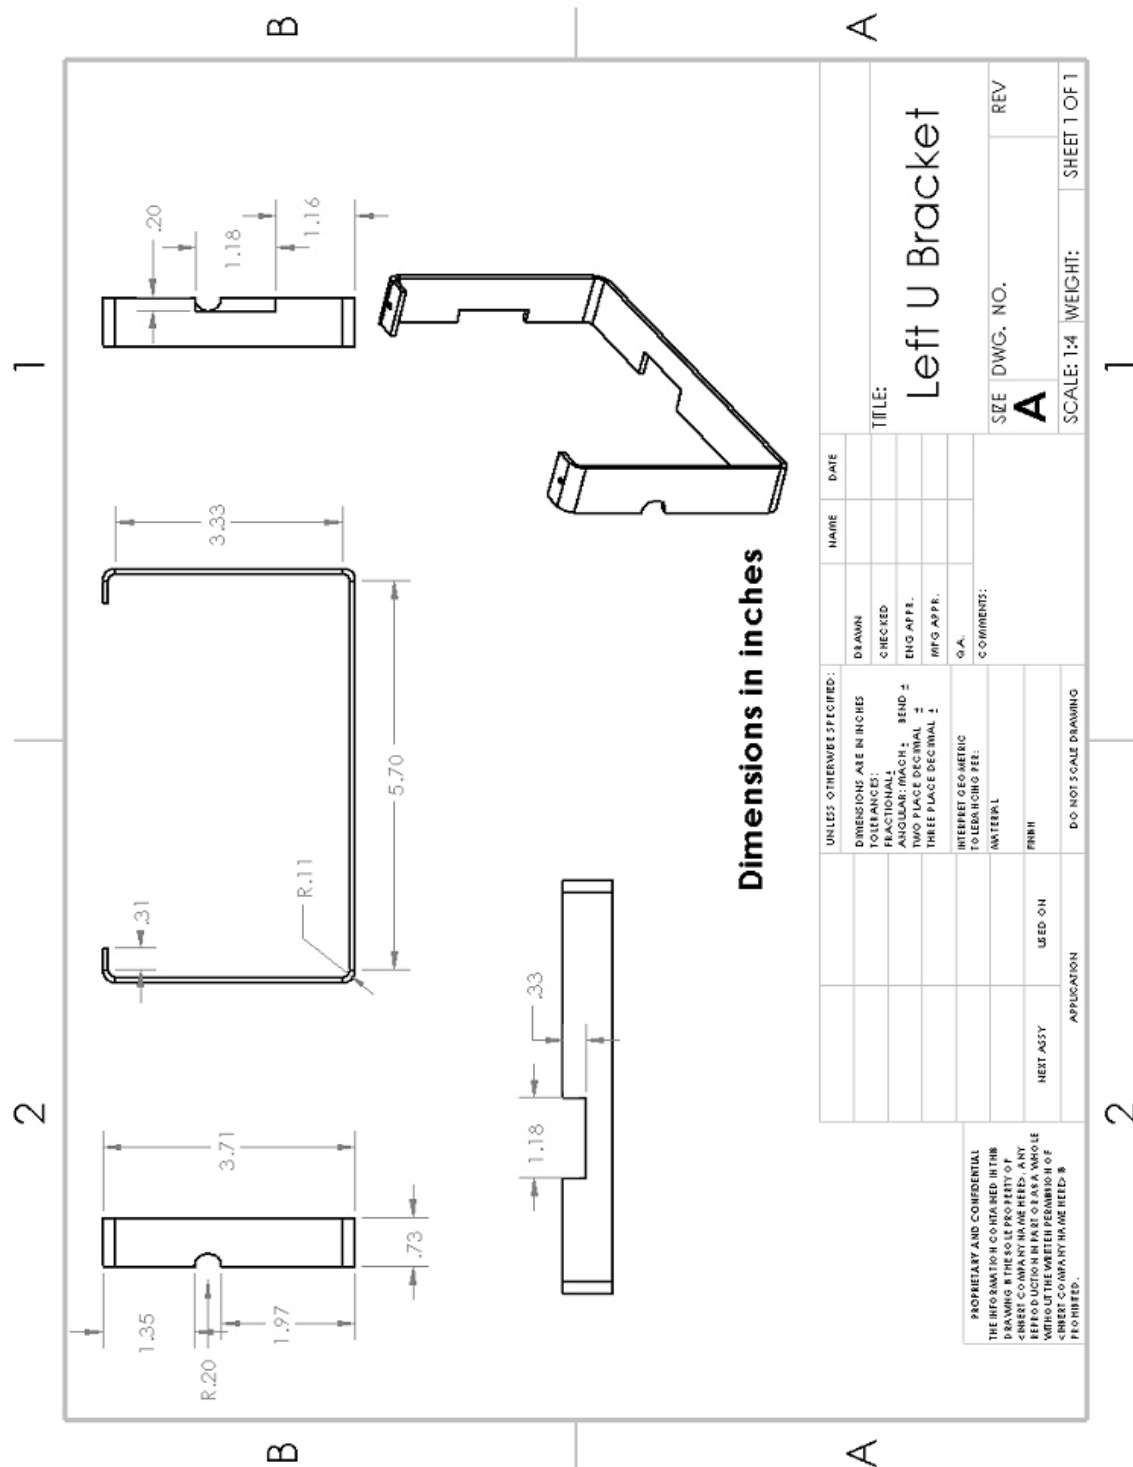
Furnace Insert – Lower U Bracket Drawing
